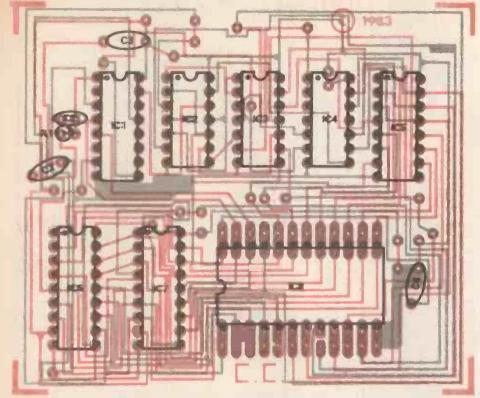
The double-sided, through-hole-plated PCB and component overlay. Readers making up a board themselves will need to wire through-links to connect the two sides of the printed circuit.
